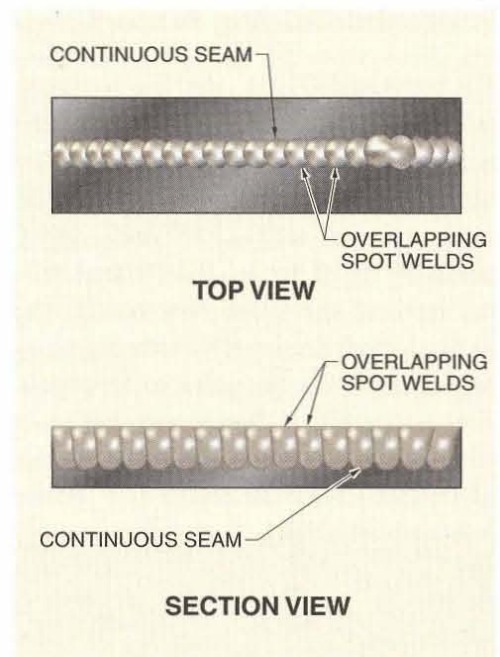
The pulsed GTAW process produces overlapping spot welds that form a continuous seam.
